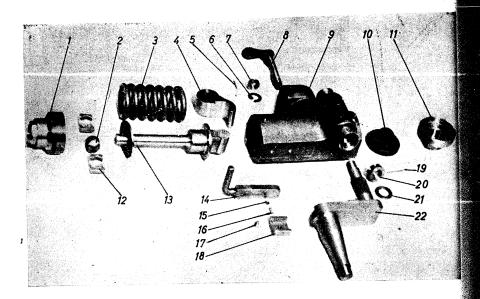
SPRING ASSEMBLY B-1 A2. B-1A1-I
